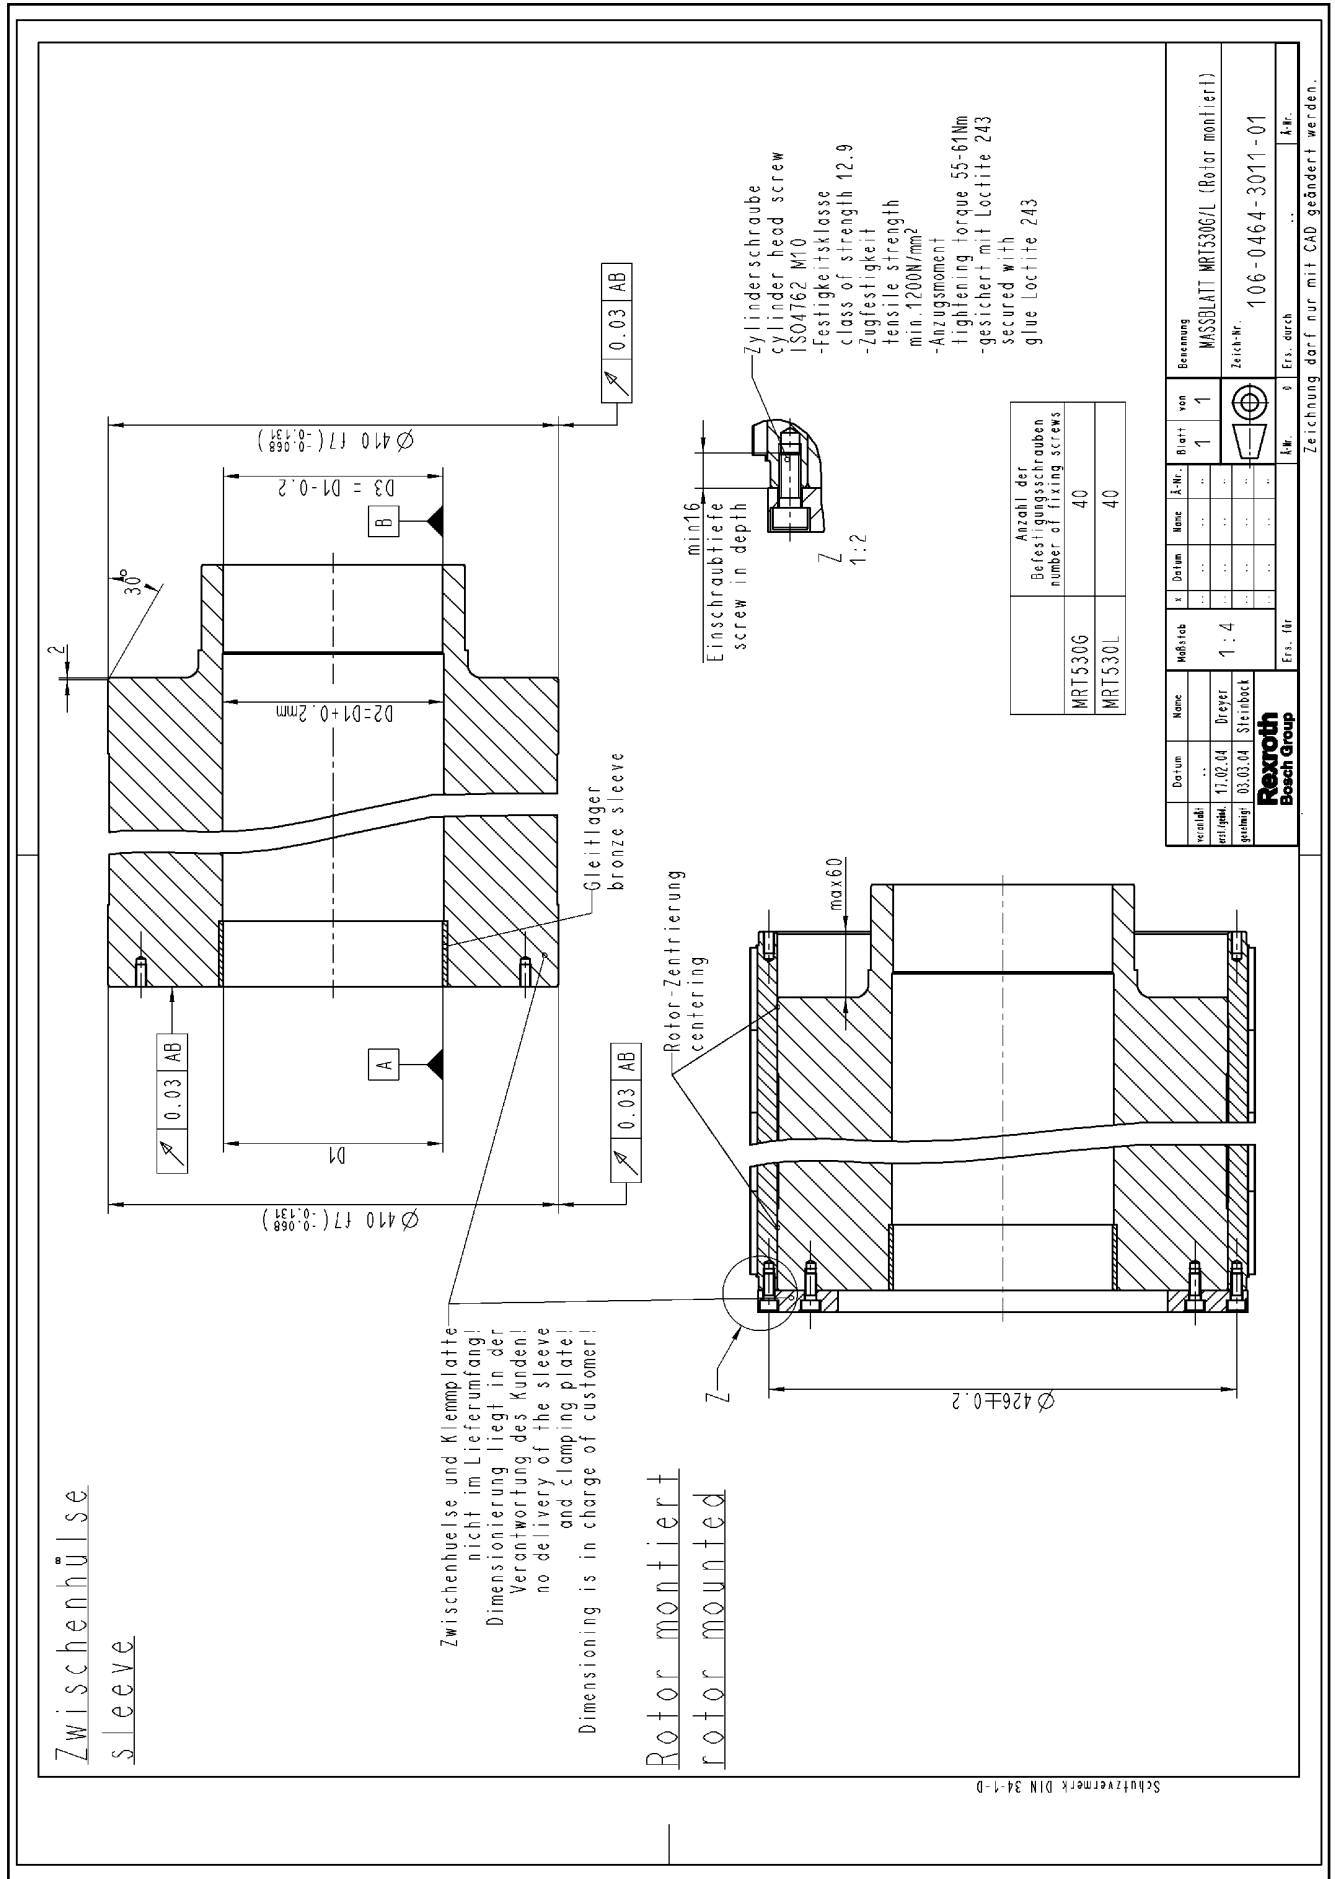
Dimension sheet for rotor, mounted - MRT530G, 530L
